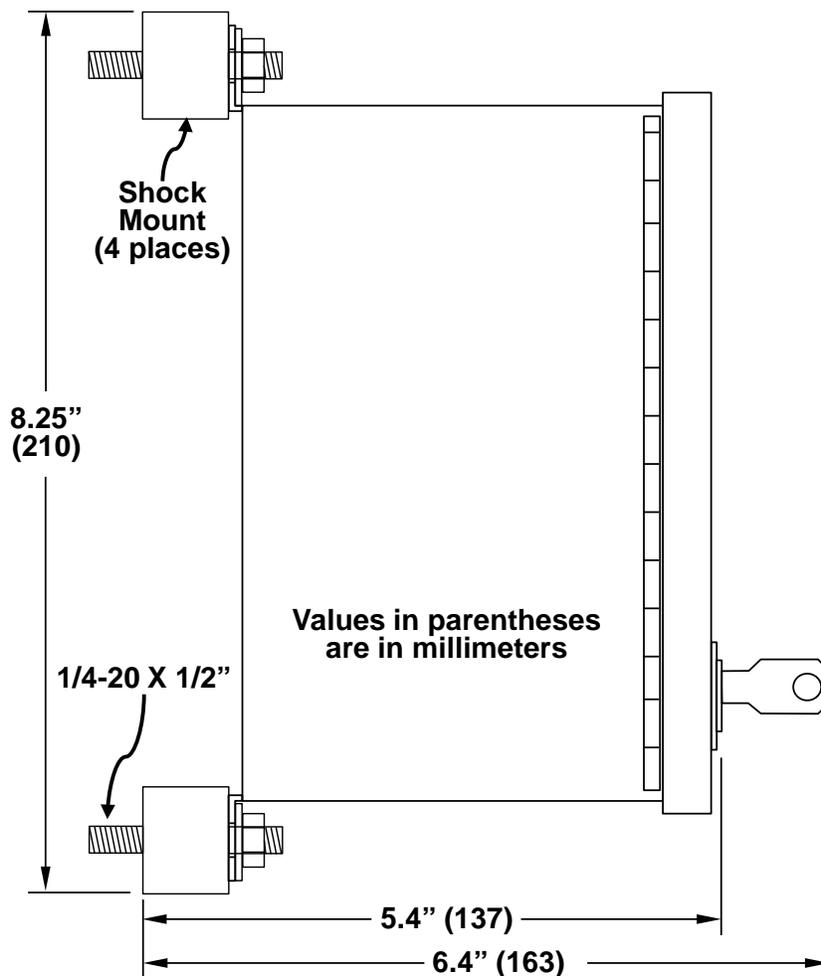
Enclosure Dimensions Side View with Shock Mounts
